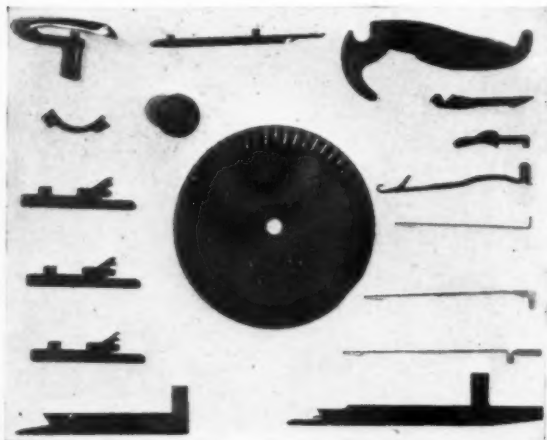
A group of knitting needles, jacks, sinkers and other parts used on textile machines. Projection is employed for inspecting all of these parts.
